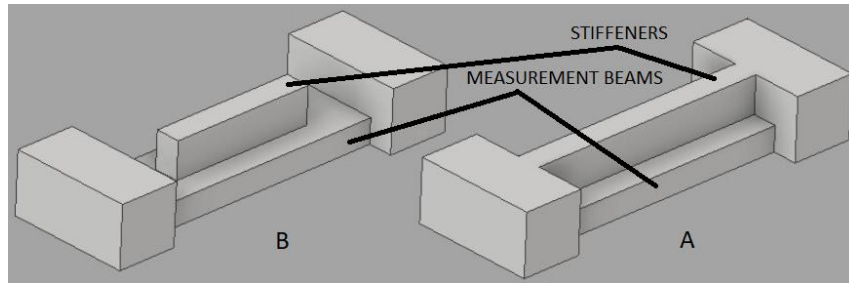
Torque Section Measurement Beam Stiffener Configuration
